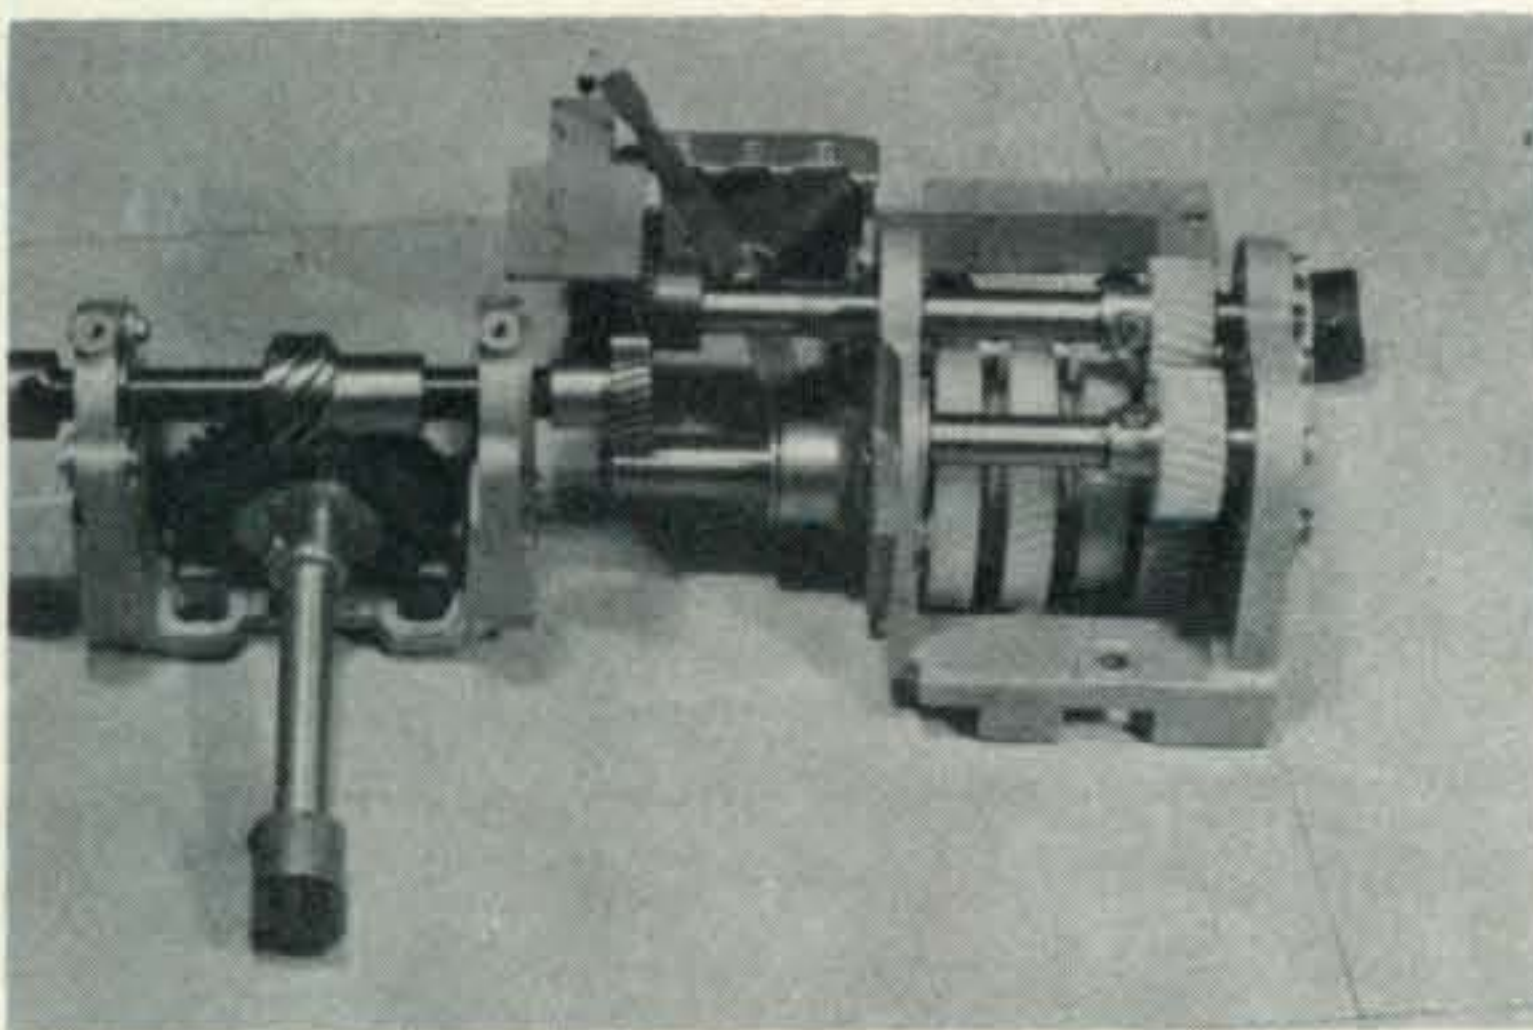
The gear shift to change speeds for the entire Model 28 ASR set. This Nylon gear transmission is quite expensive. As shown, it offers 60-67-100 w.p.m., but 60-75-100 w.p.m. gears may be mounted in the same frame. This changes speeds for the transmitter-distributor and the keyboard reperf as well as the printer.
